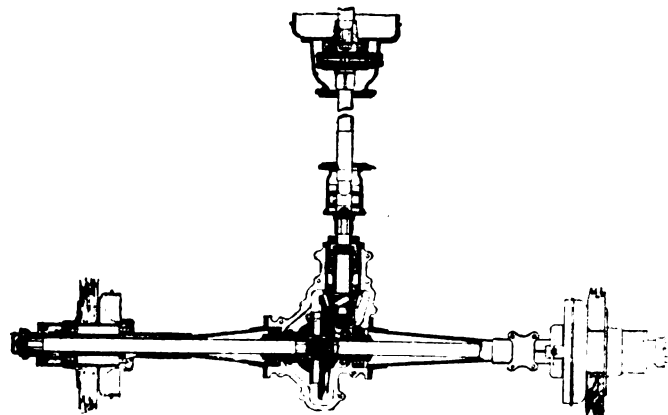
Part Sectional Plan of Cardan Shaft and Live Axle.
